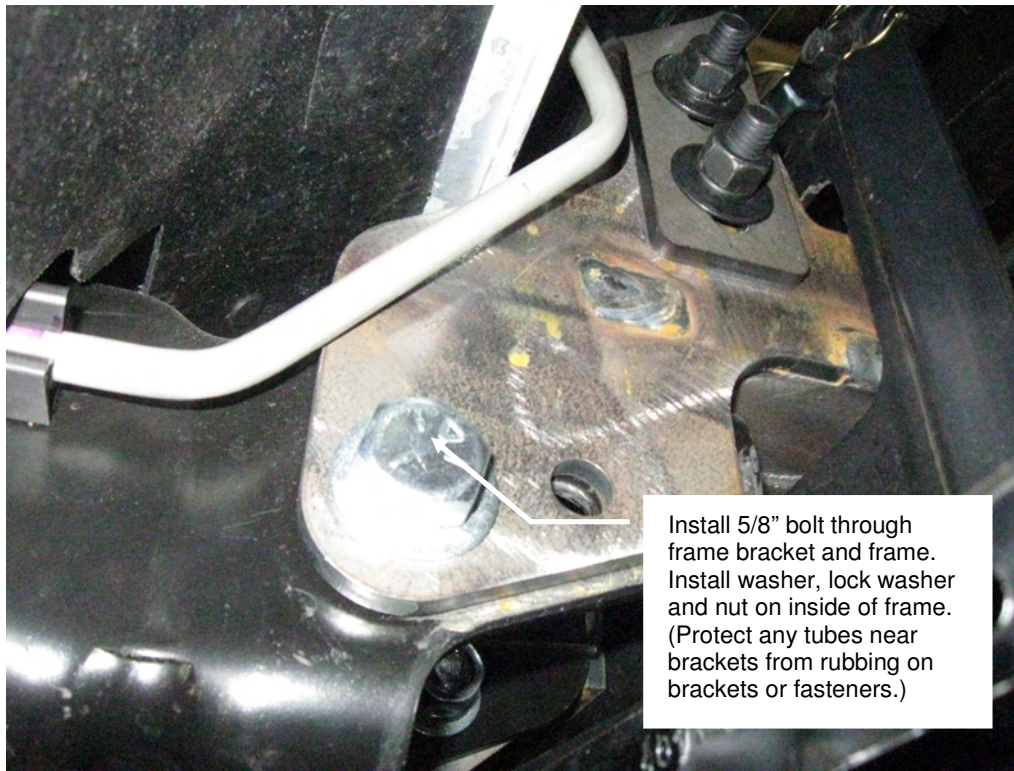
Frame Bolt Installation. (Passenger Side shown.)
